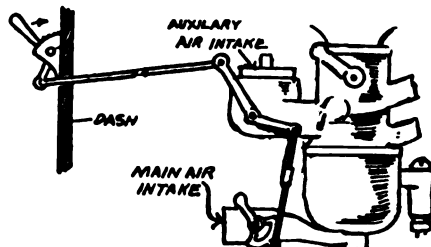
A Damper is Provided in the main air intake pipe. When closed the suction of gasoline is more than air. Sometimes the tension of the spring on the auxiliary air valve is regulated from the dash or steering post. This regulates the feed of gasoline or air.
